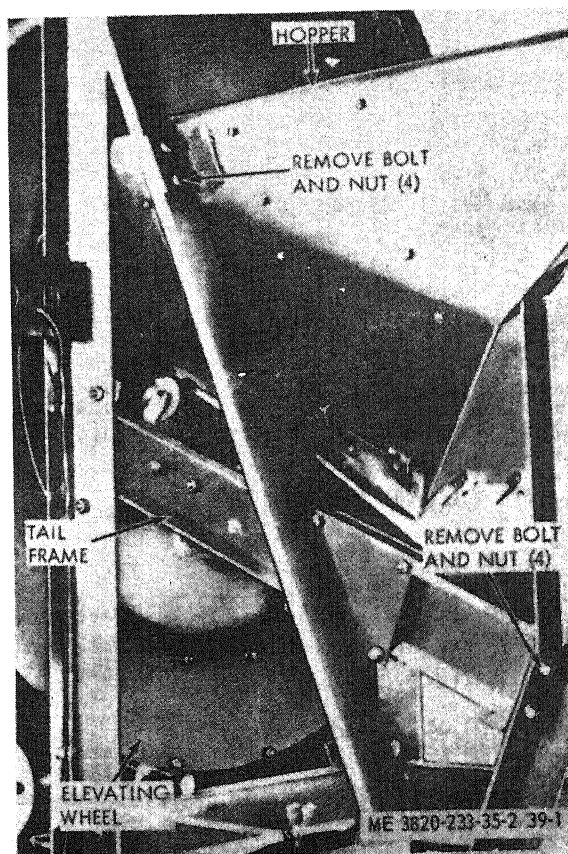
Conveyor tail frame and hopper, removal and installation.
